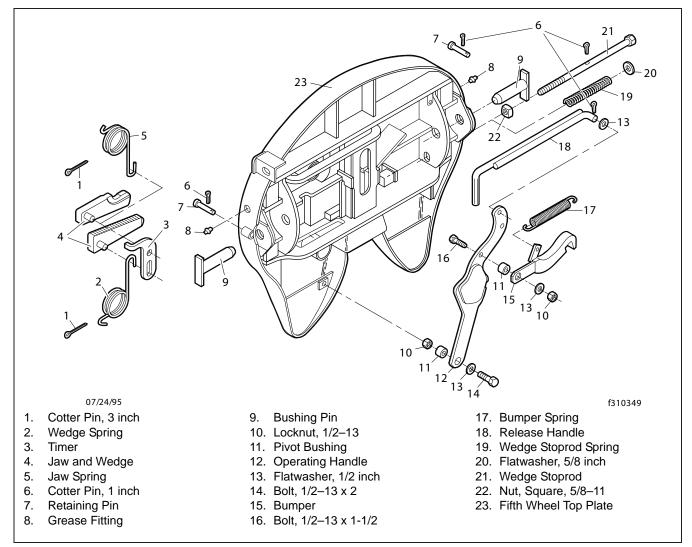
Fontaine 6000/7000 Series Fifth Wheel (right-side release shown)
